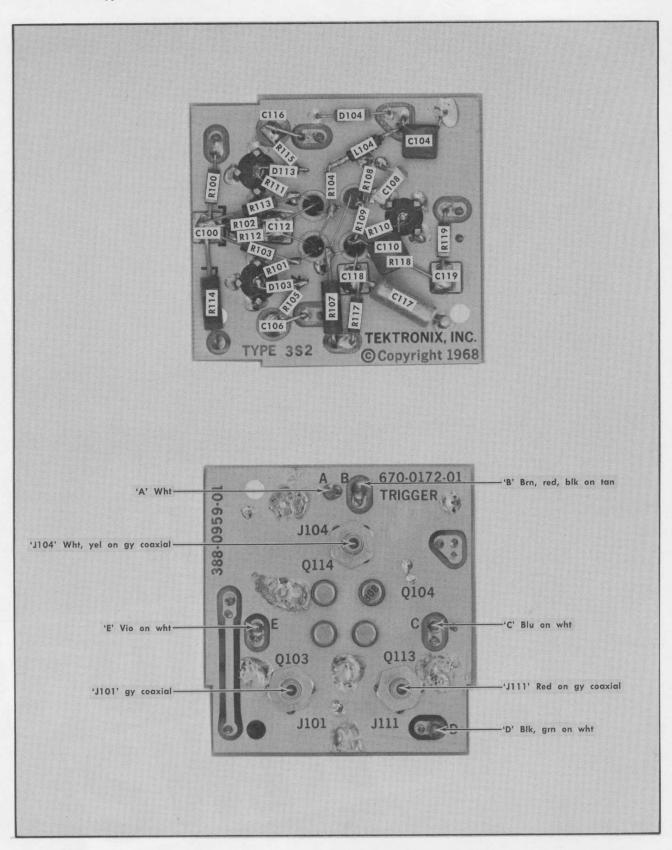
Trigger circuit card assembly, SN B040250-up.
